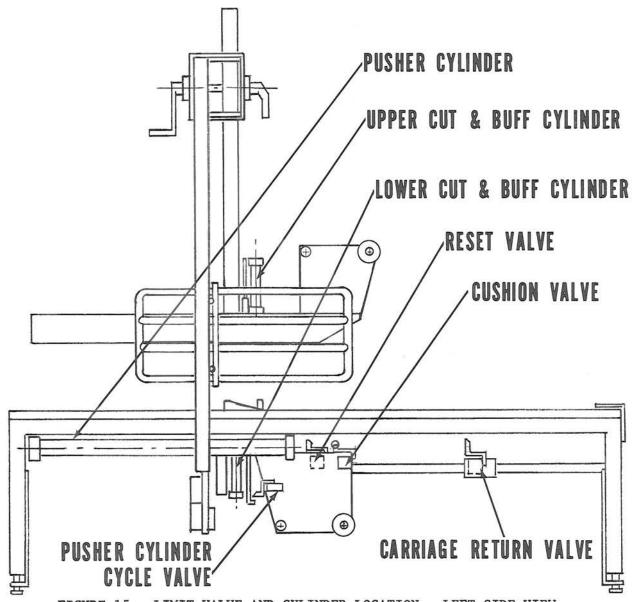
LIMIT VALVE AND CYLINDER LOCATION - LEFT SIDE VIEW
